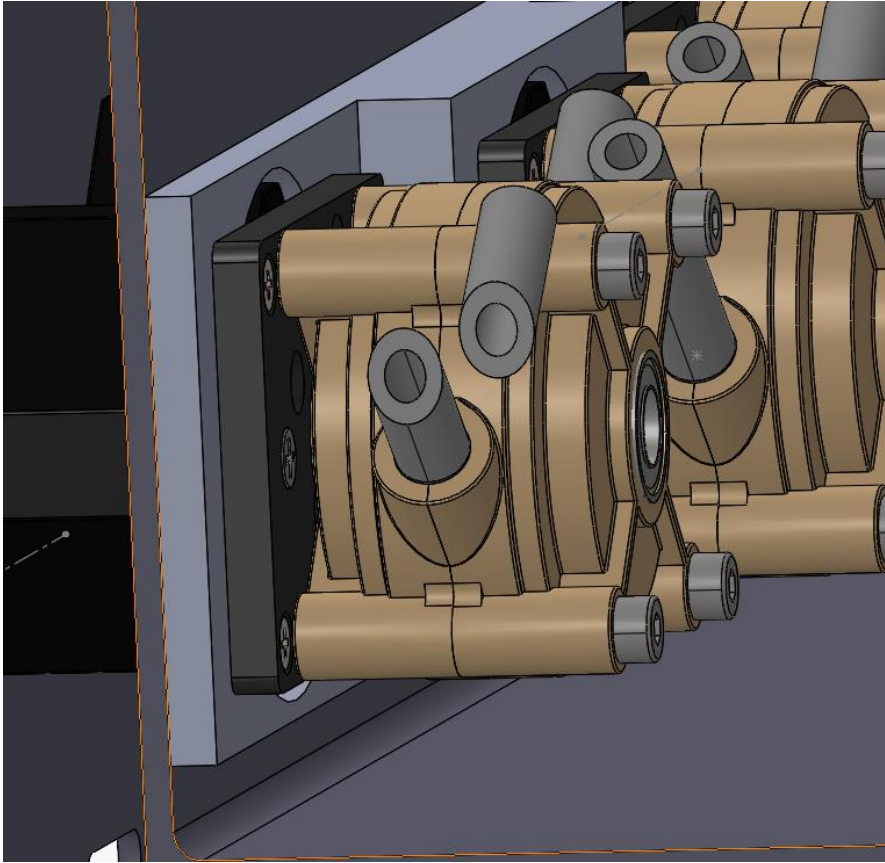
The pump with the holder along with the stepping for easier pipe connectivity.
